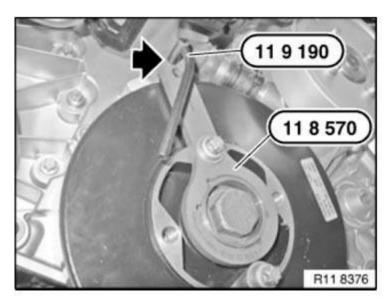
Identifying Special Tools 11 9 190 And 11 8 570 Courtesy of BMW OF NORTH AMERICA, INC.
